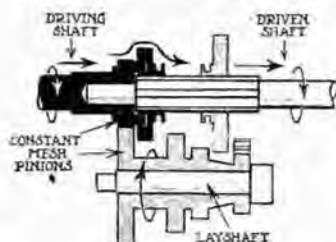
How the power is transmitted in top gear. The black portion represents the pinions actually engaged, while the layshaft pinions run idle.
